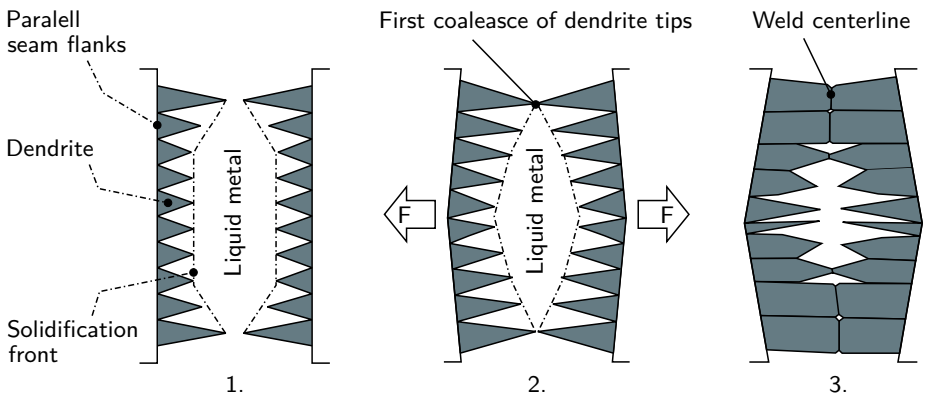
Hypothetical formation of a centerline solidification crack in deep penetration laser beam welding of low-alloyed and unalloyed steel sheets, according to [14]
